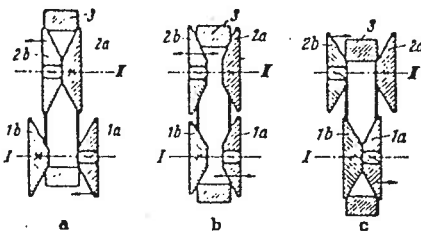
Working principle of the Heynau drive. I—Driving shaft; II—Driven shaft.
